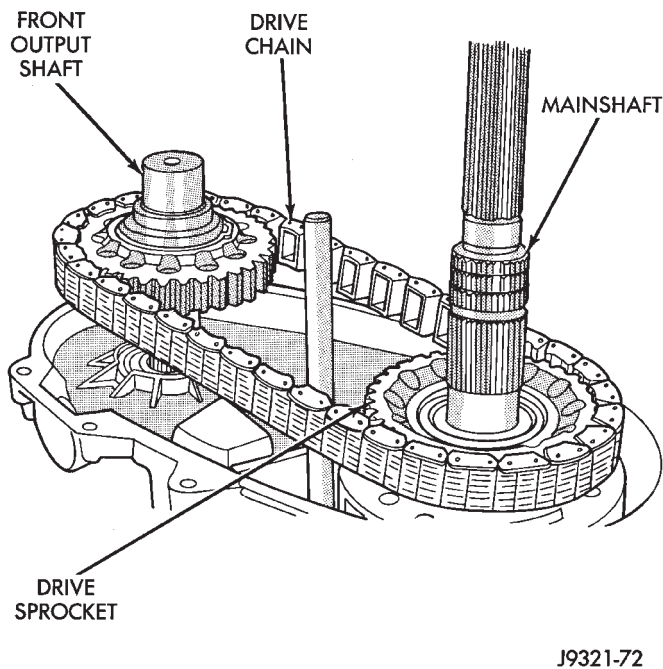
Installing Drive Chain, Front Output Shaft And Drive Sprocket
